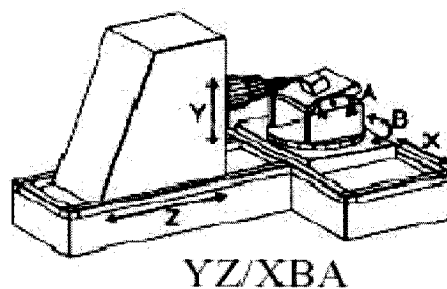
The configuration of the 5-axis machine Mitsui Seiki HU80A-5x
